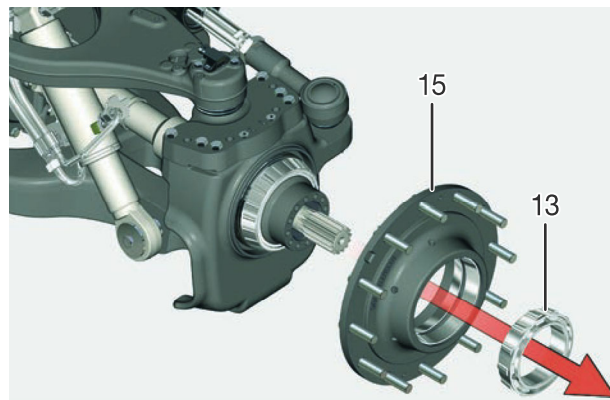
Harness the wheel hub (15). Partially extract the hub (15) using an extractor. Remove the external bearing (13).
